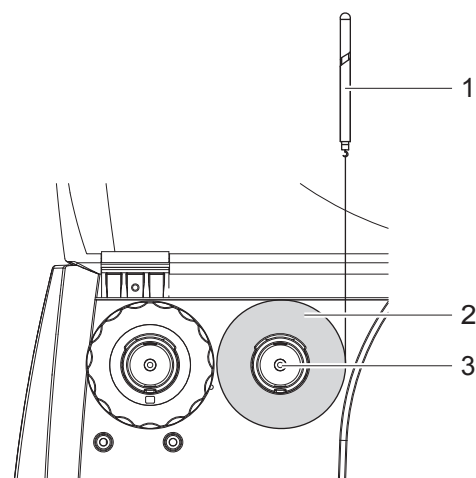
Measure braking force on supply hub - inside wound transfer ribbon
